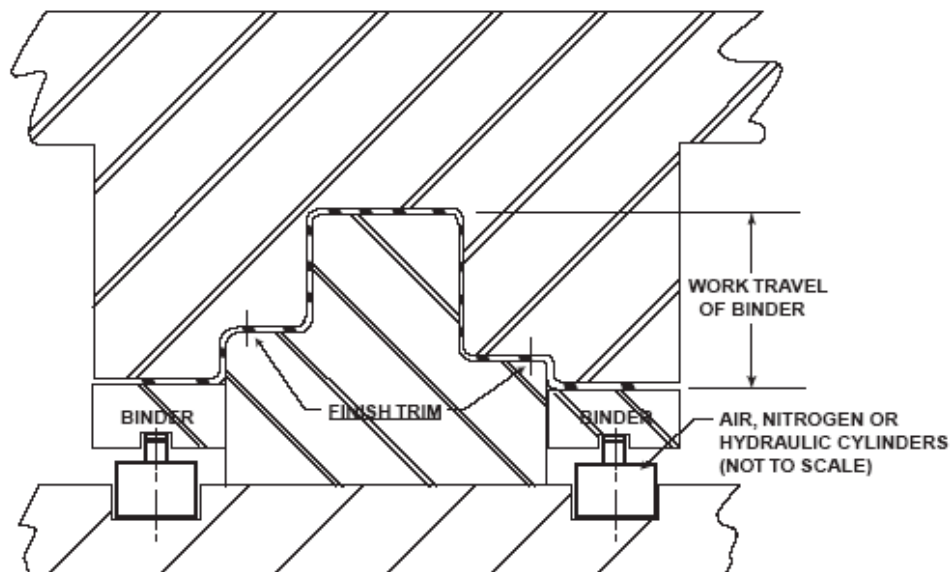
Draw-Die Single Action Press (Lower Binder)
